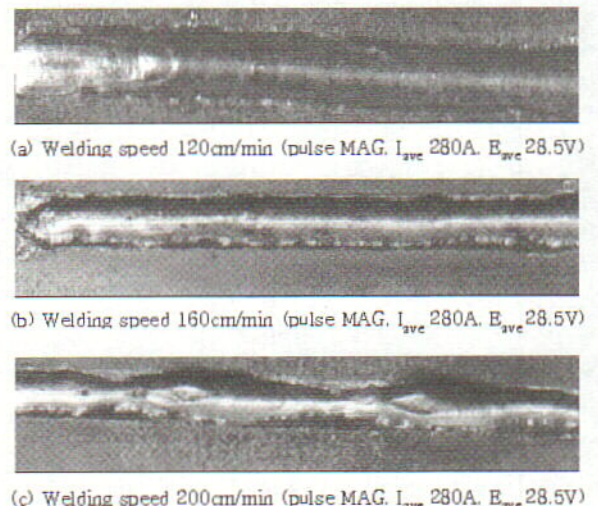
Variation of bead appearance by welding speed in pulse MAG welding
